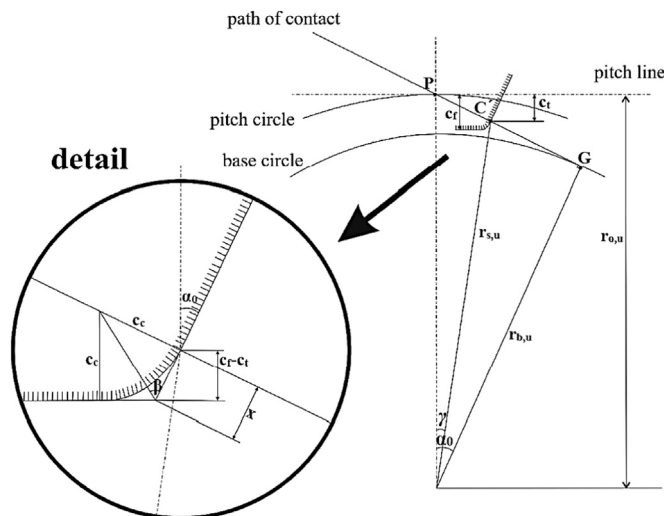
Geometry of gear cutting at the tooth fillet [44].
